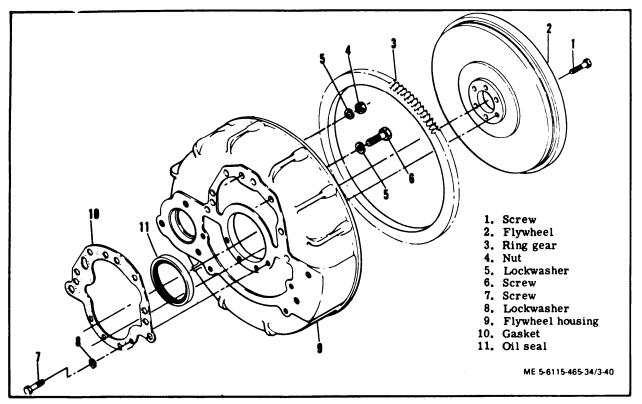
Flywheel and Flywheel Housing, Exploded View
